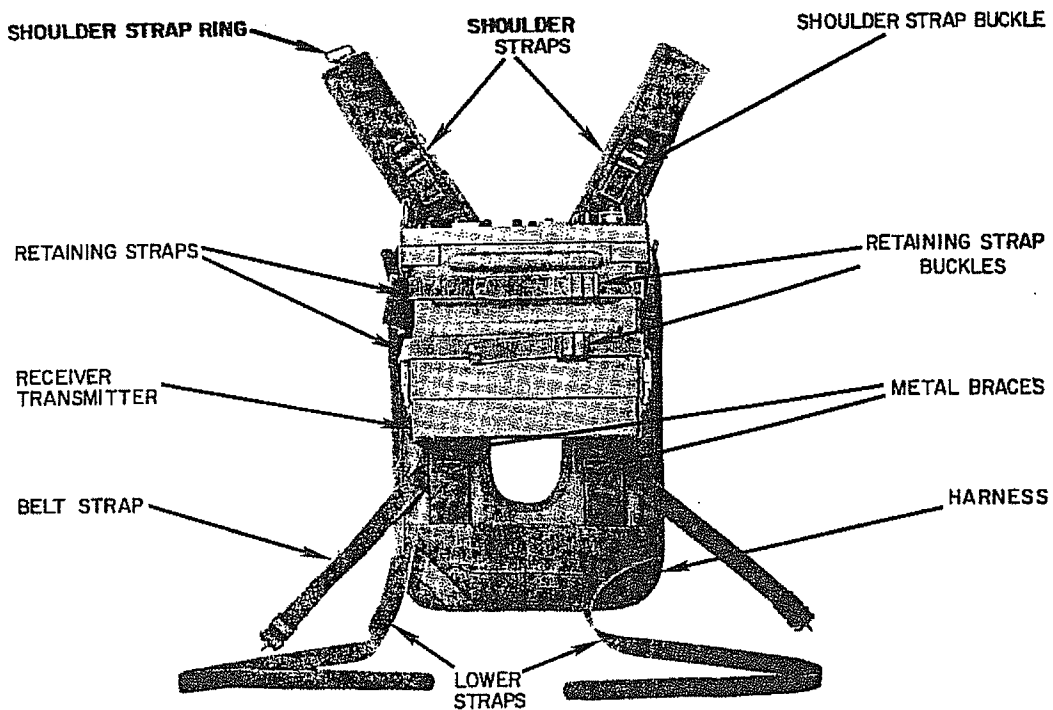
Assembly of Receiver-Transmitter to Harness
